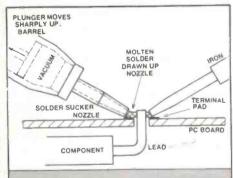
Using a solder sucker. First heat the joint until the solder melts. Then apply the solder sucker nozzle and release the plunger to suck up the molten solder. It is sometimes best to remove the iron before releasing the plunger. The solder sucker's nozzle and barrel has to be cleared of the solid solder 'dags' periodically.
